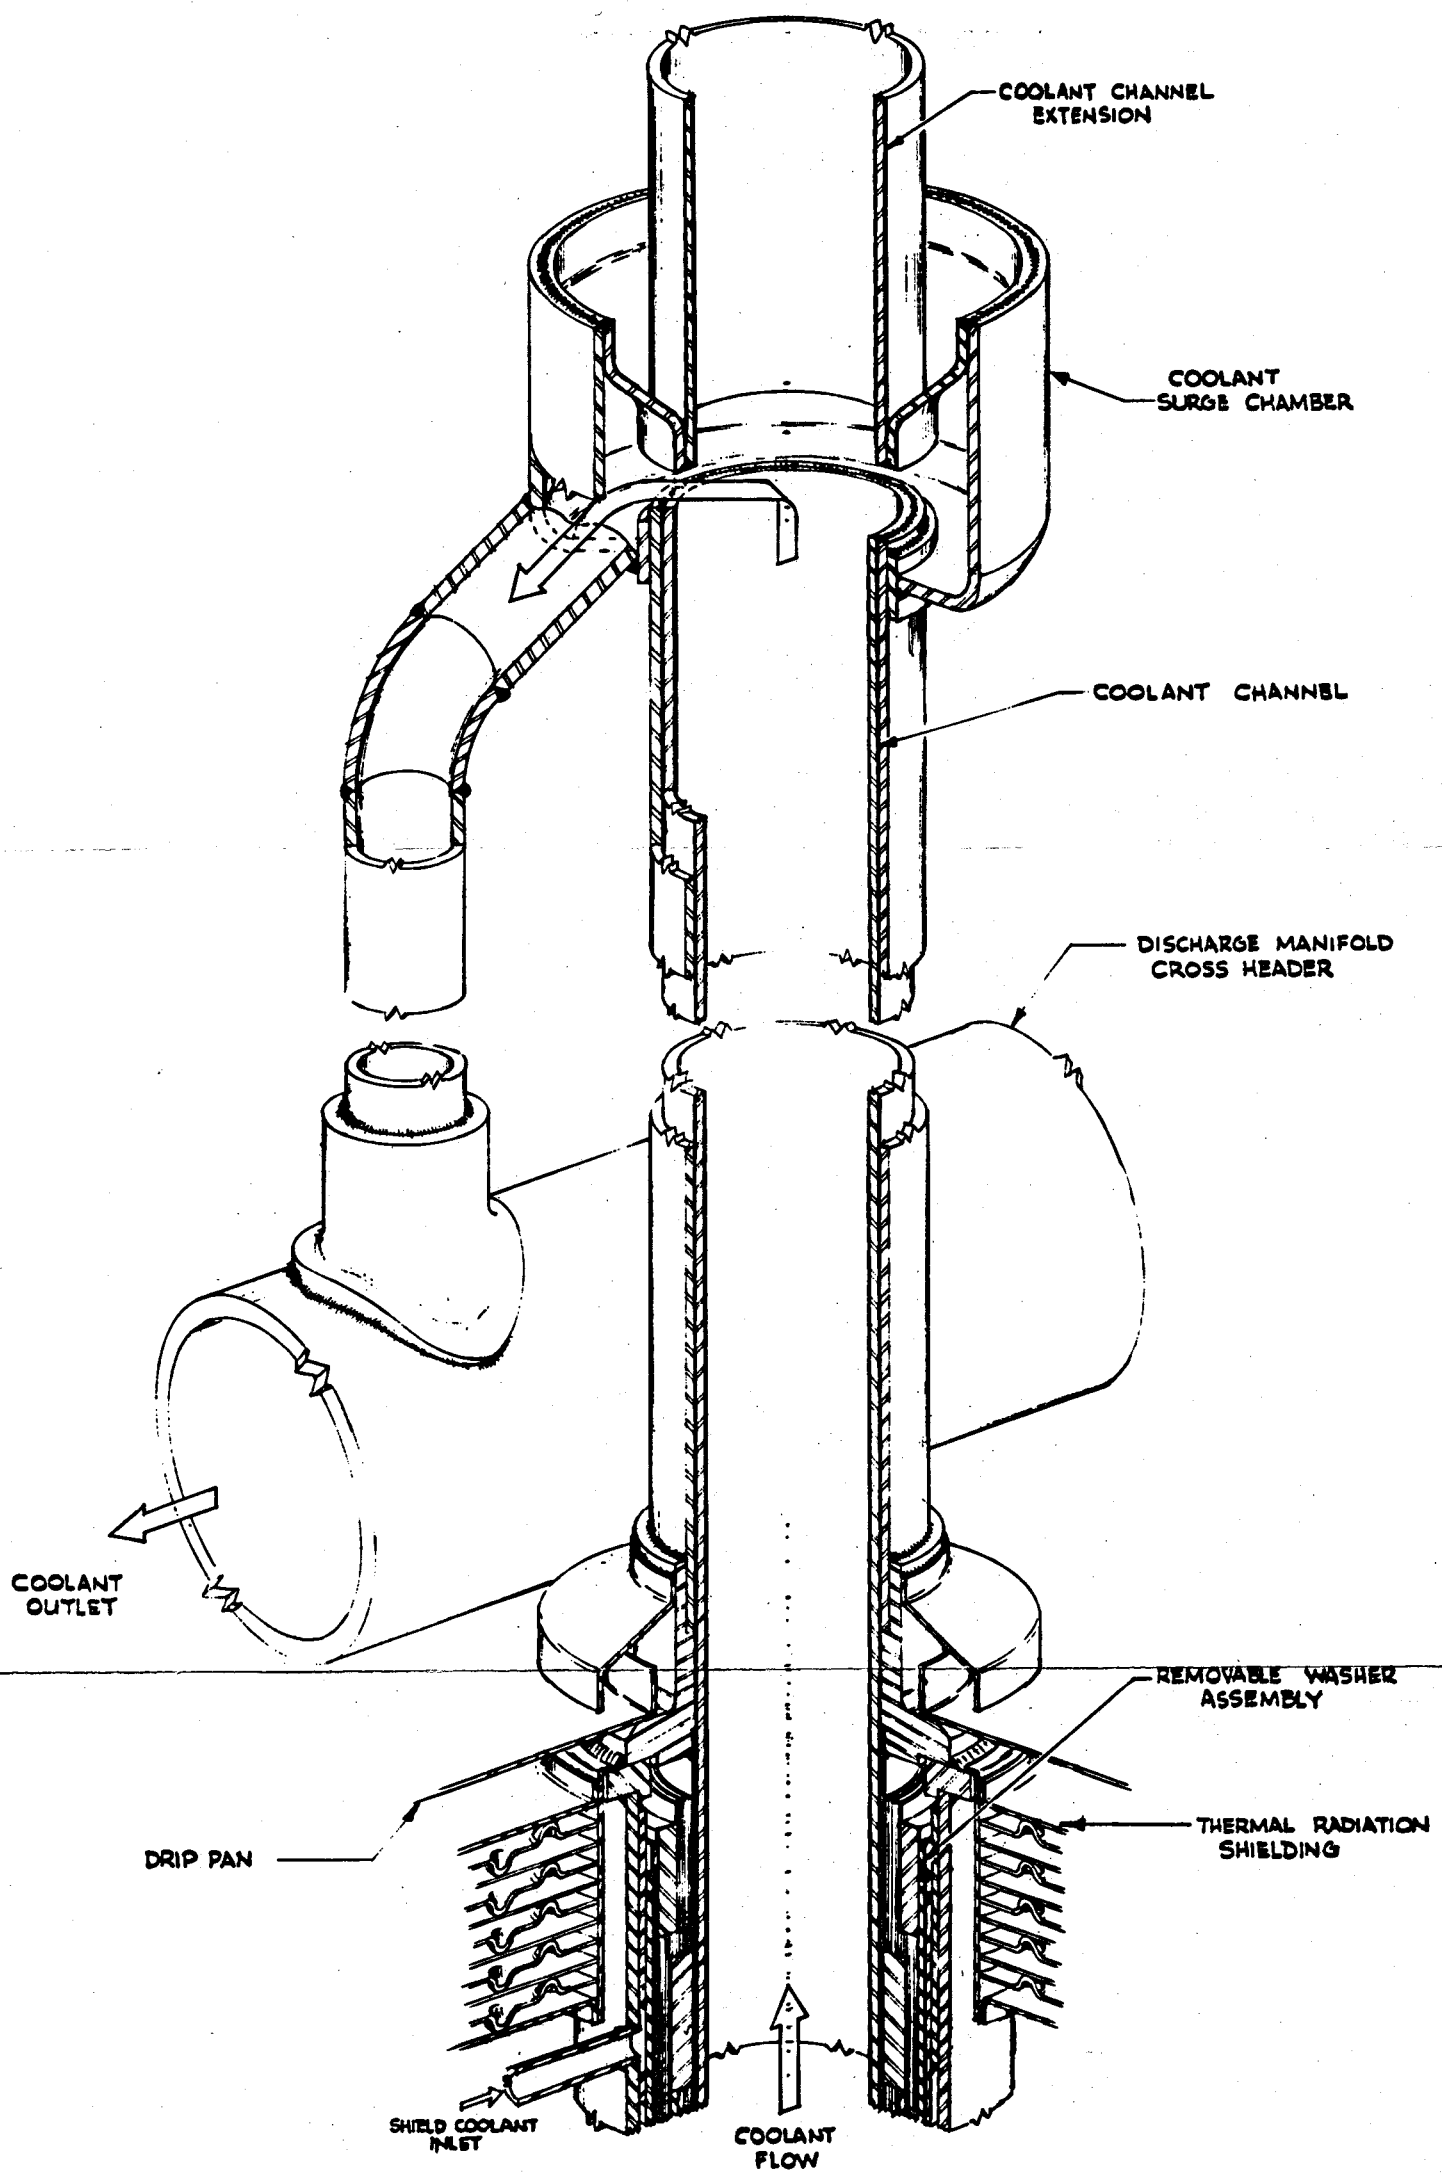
Coolant Channel Perspective Section thru Outlet Manifold
